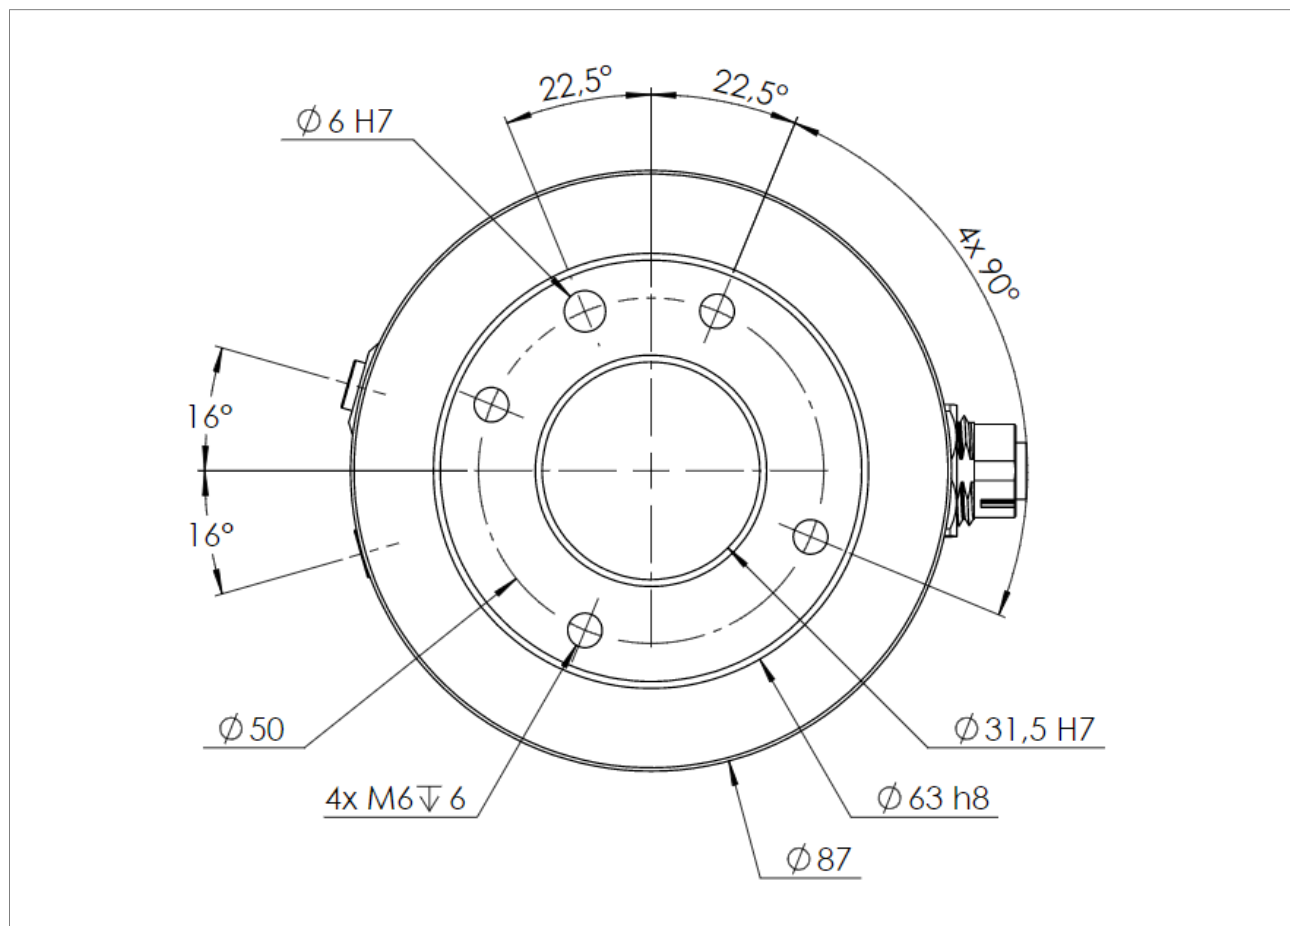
CL1 tool flange (ISO-9409-1-50-4M6) dimensions (all dimensions in mm)
